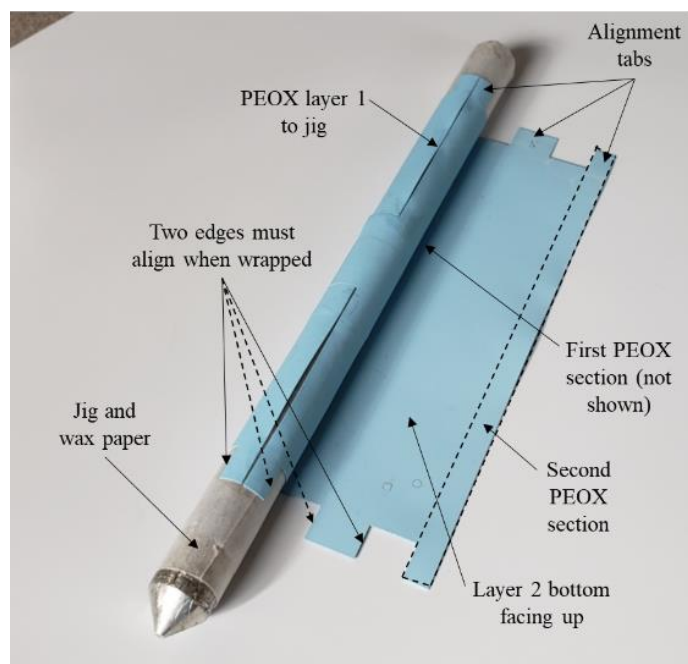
Layer by layer technique: layer 1 has been completely wrapped around the jig and layer 2 is about to be wrapped. The jig is covered with wax paper to prevent sticking. Alignment tabs help with alignment during wrapping, and PEOX holds the structure together prior to lamination.
